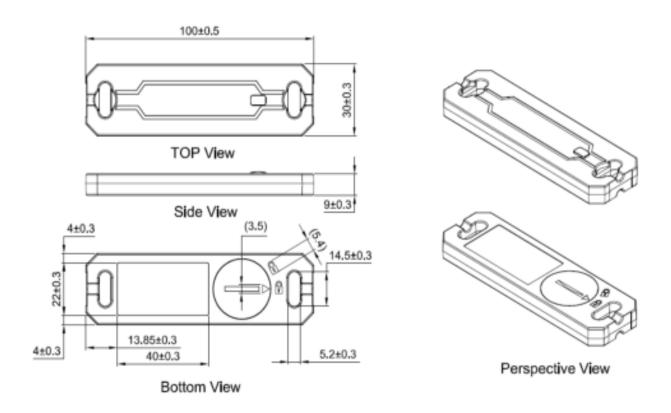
Layout and Dimensions of Semi Passive LED Tag
